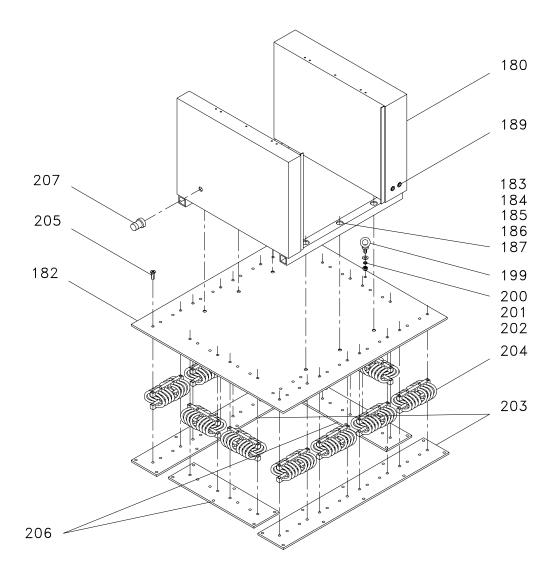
High Pressure Breathing Air Compressor (HPBAC) (Sheet 7)
